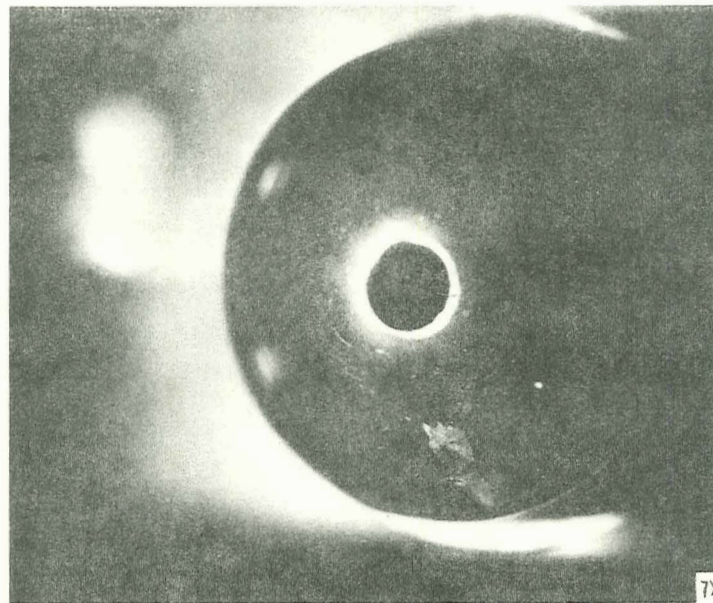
Photomicrograph of flex mounted pivot ball and socket showing surface damage (turbine end).
